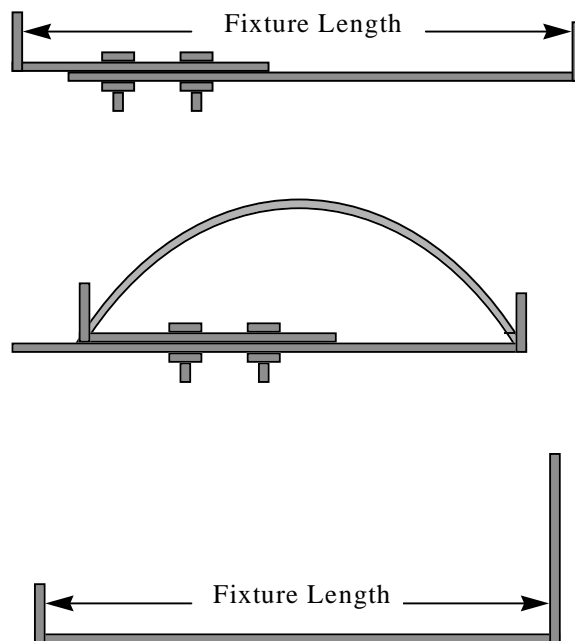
Bend-compression rupture fixture. Pictured from top down: adjustable fixture, fixture with loaded specimen, and high capacity long-term fixture
